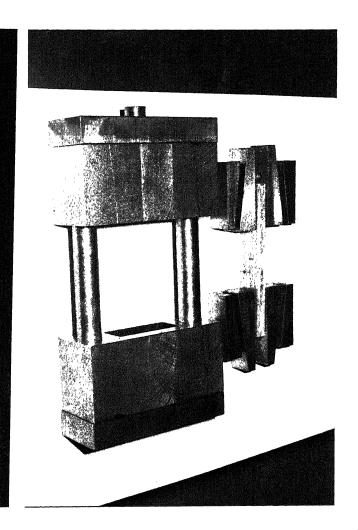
PHOTOGRAPH SHOWING COMPRESSIVE STRENGTH TEST FIXTURE.
